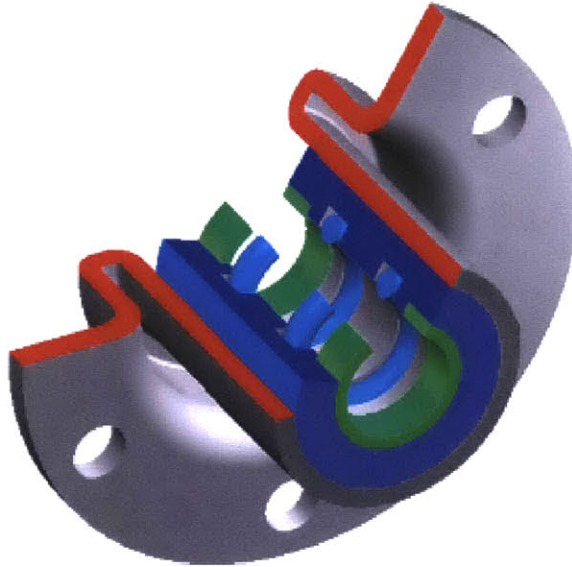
Drawings of the pitch seal assembly with shaft seal. These shaft seals are identical to the shaft seals used in the bellows. There are two buna-n o-rings and two teflon bushings. The purpose of the teflon bushings is to transmit radial loads and to prevent compression set from occurring in the o-rings. There is an aluminum ring that is used to hold the seal boot to the Delrin pitch housing. There is a gasket seal formed between the planar surface of the seal boot and a planar surface on the pitch housing. The compliance in this boot also allows the dimensional tolerances on the location and alignment of the pillow blocks to be drastically relaxed. Reducing these tolerances greatly simplified the fabrication and assembly of the actuator.
